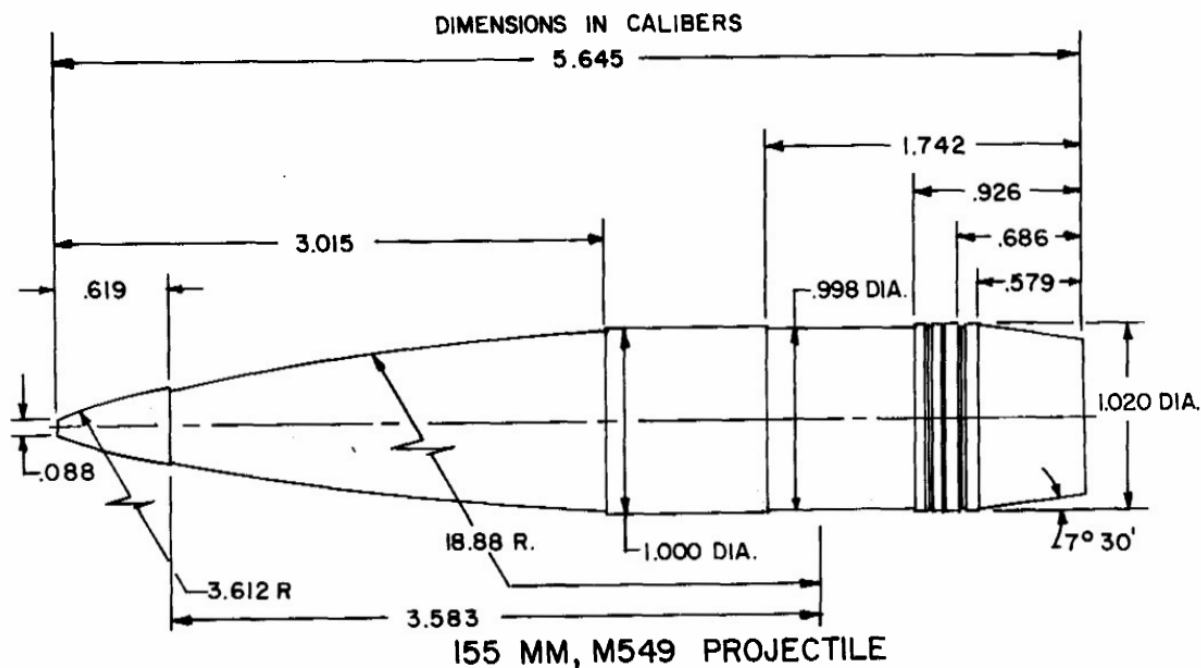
Drawing of the 155-mm M549 projectile³⁵.
